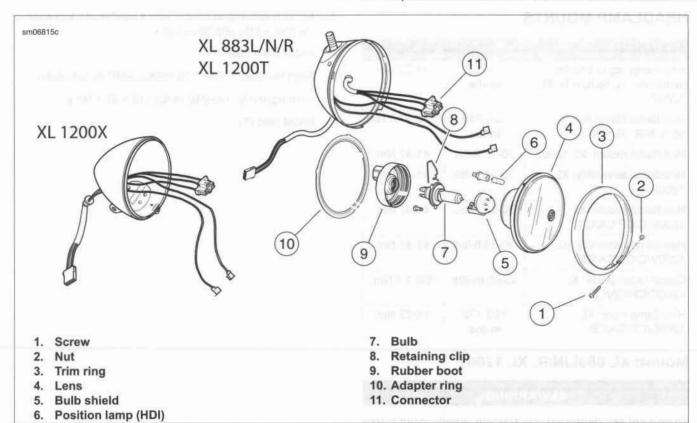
Headlamp Assembly: XL 883L/N/R, XL 1200T/X
